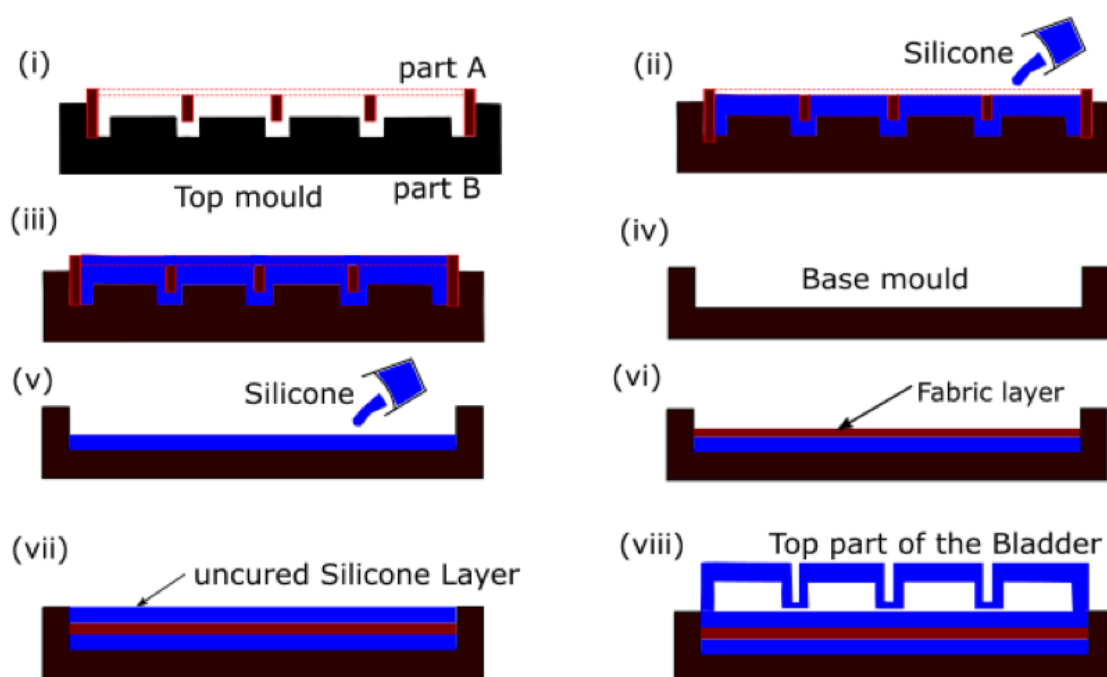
Manufacturing process of mini-bladders (i) the top mould (consisting of two parts), (ii) pouring silicone to the top mould (iii) top mould filled with silicone and removed the excess (iv) the base mould, for creating the bottom part of the bladder (v) pouring silicone half way up to the mould (vi) submerging the fabric layer (vii) pour the remaining half of silicone (viii) top part of the bladder was immersed into the base uncured silicone layer.
